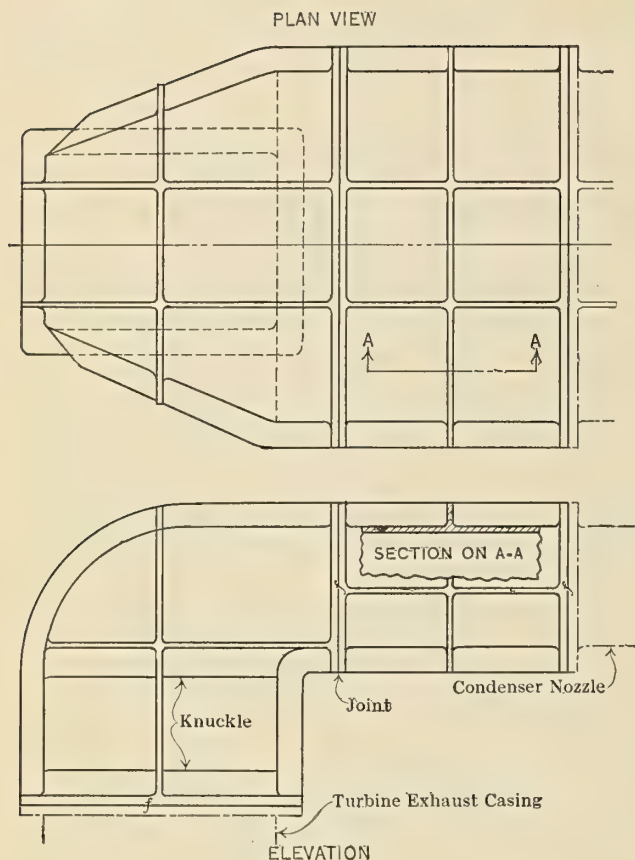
Two-Piece Cast Iron Exhaust Pipe
